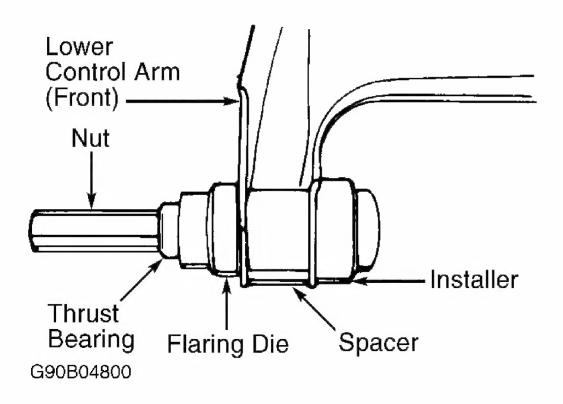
Flaring Lower Control Arm Front Bushing Courtesy of GENERAL MOTORS CORP.
